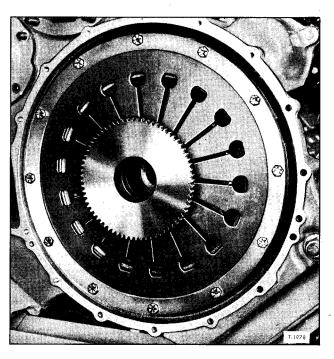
Clutch Cover Plate, Diaphragm Spring, and Oil Pump Drive Gear Installed
